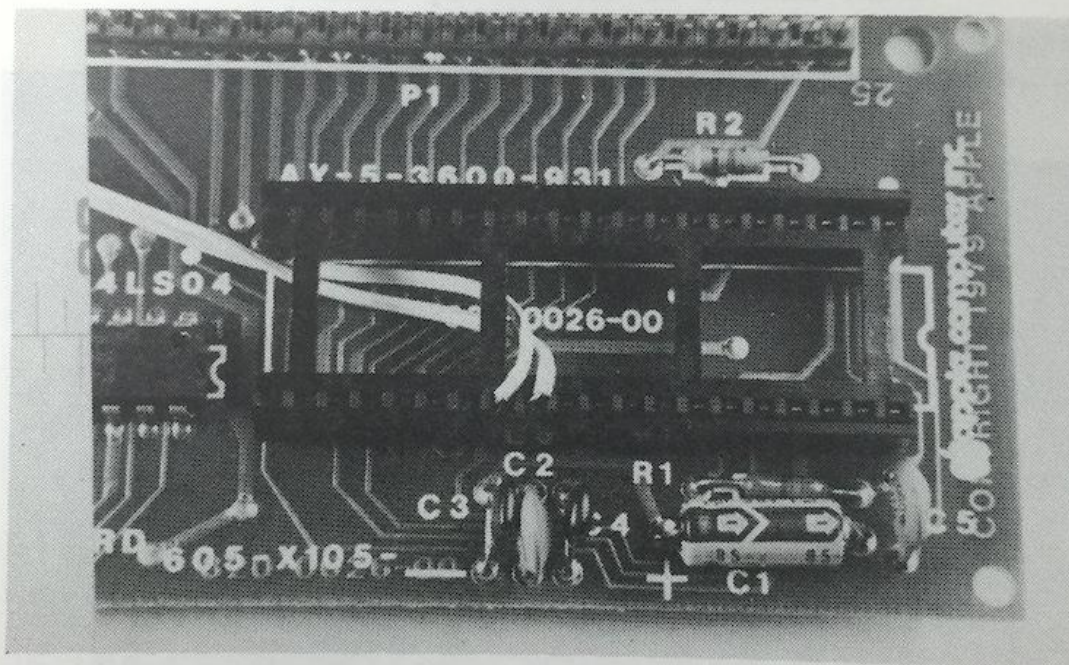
Jumper Cable Connection with Keyboard IC, Piggyback Keyboard Version
